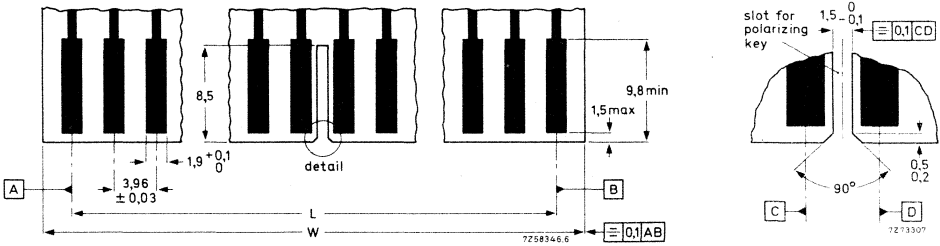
Recommended dimensions of the printed-wiring board; see Table 4 for dimensions L and W.
